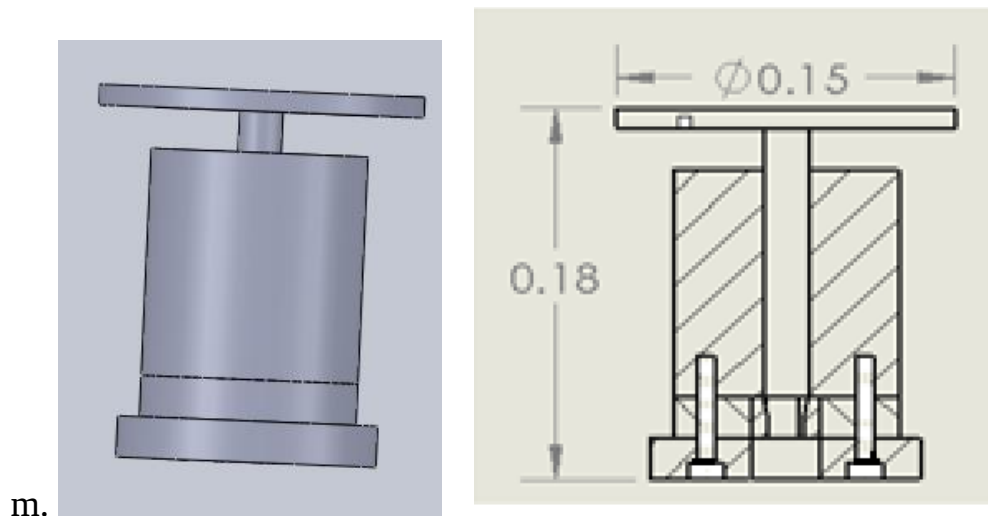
17 l) 3D and 2D section view of die and m) 3D assembly and 2D sectionsl view drawing
